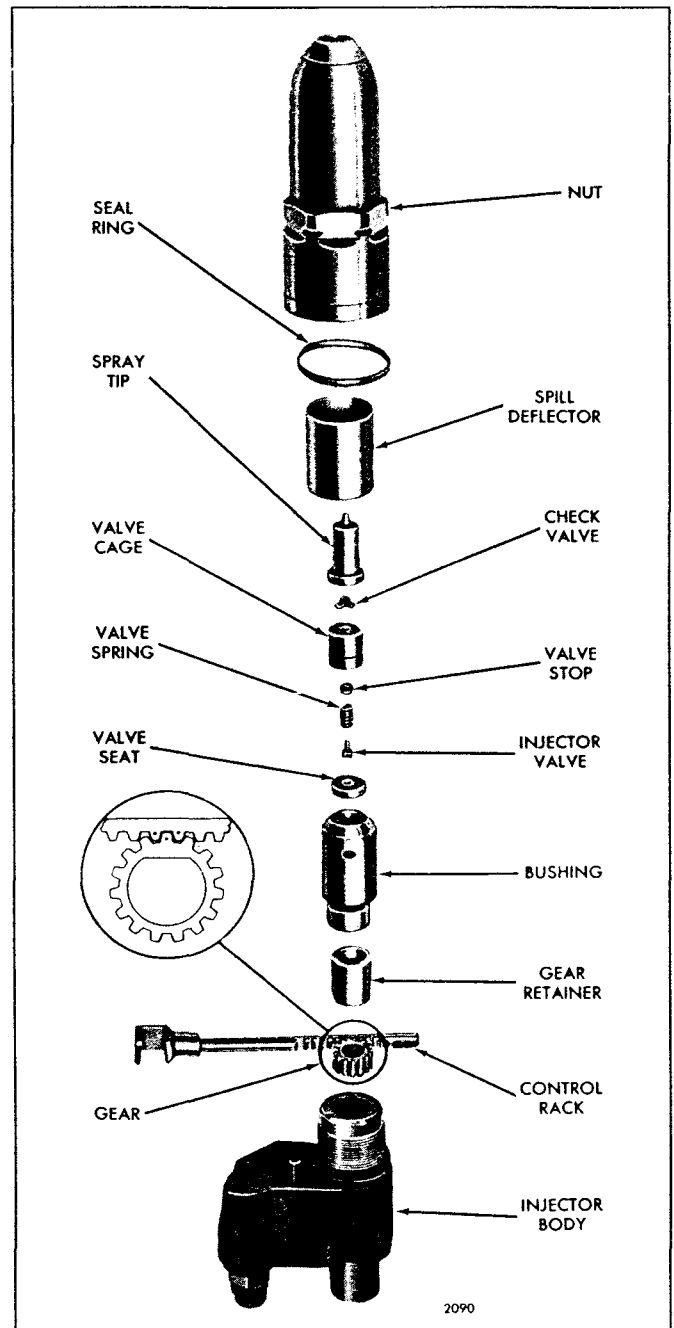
Injector Rack, Gear, Spray Tip and Valve Assembly Details and Relative Location of Parts
